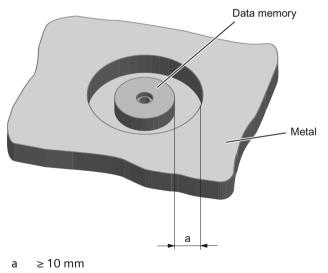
Mounting of the RF330T in metal with 10 mm clearance
